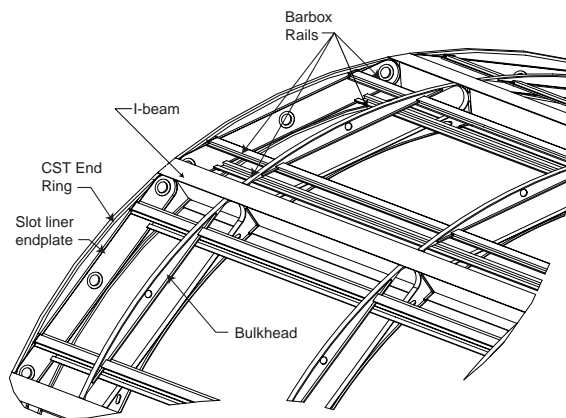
Details of the Central Support Tube assembly near the end opposite the Transition Flange. The inner and outer skins have been removed, as well as the four pieces of stainless steel sheet metal that form the slot liners when bolted to the rails. The rails and slot liners extend all the way through the Transition Flange.
